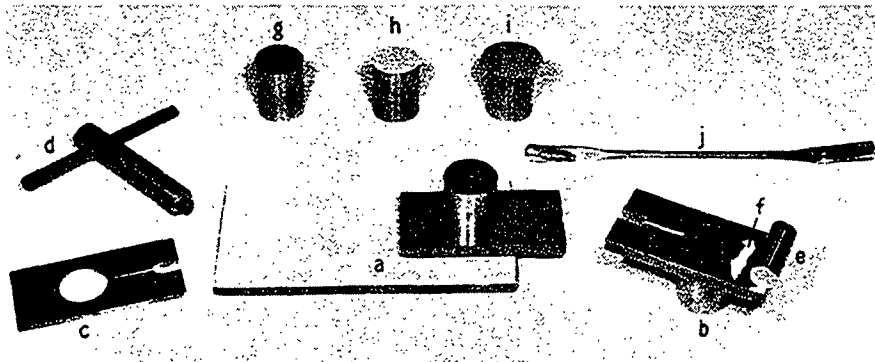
Equipment Used for Applying the Adhesive Film to the Cylinder Surfaces (33): (a) Jig and Cylinder Assembled on Glass Plate, (b) Cylinder Aligned in Jig with Doctoring Tool and Adhesive Bead Ready, for Spreading, (c) Jig (One Required), (d) Key, (e) Doctoring Tool, (f) Adhesive Bead, (g) Clean Cylinder, (h) Cylinder with Adhesive Film on Surface, (i) Cylinder with Adhesive Film and Specimen on Surface, and (j) Spatula
